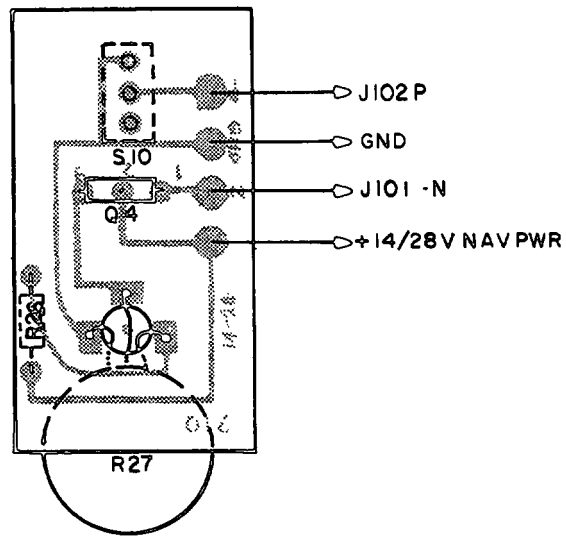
P.C. BOARD ASSEMBLY, BOARD 210, DRAWING
